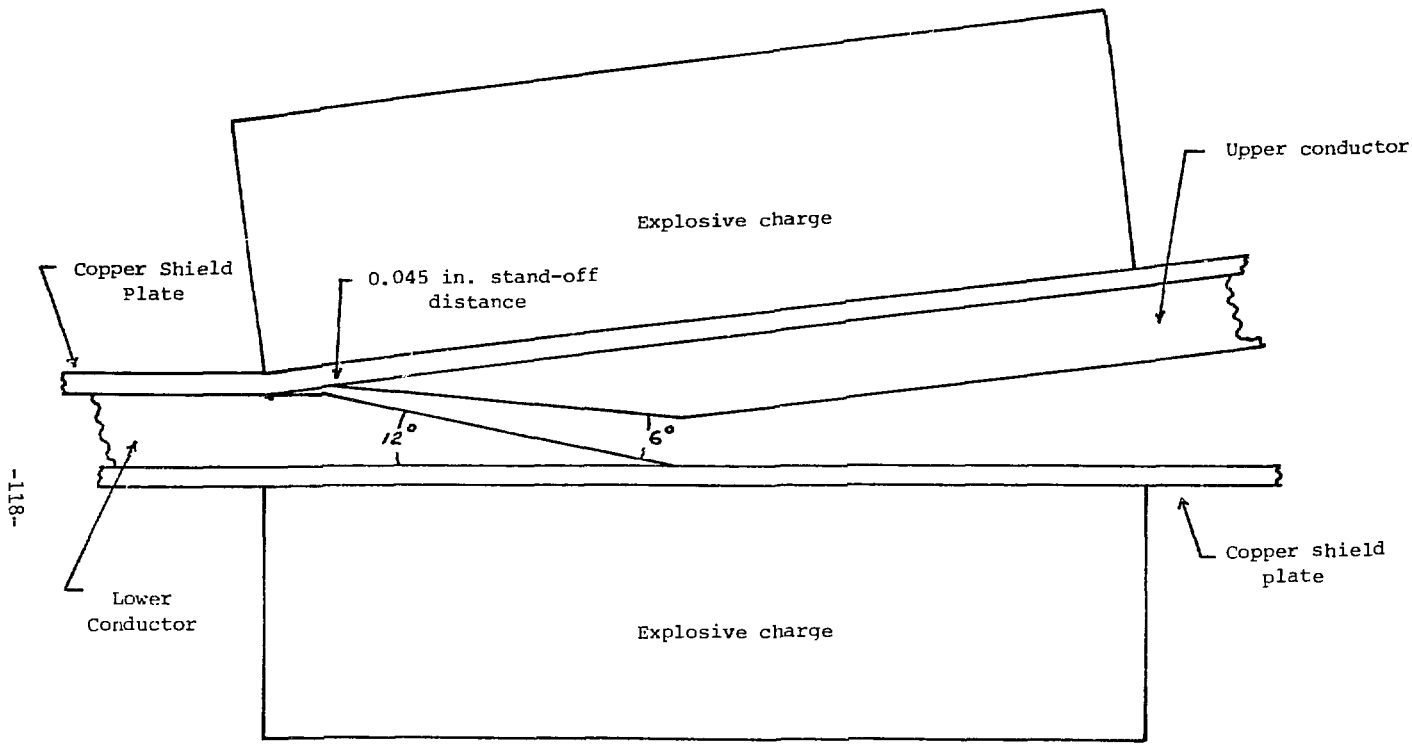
MODIFIED SET-UP FOR EXPLOSIVE WELDING OF SUPERCONDUCTOR JOINTS
